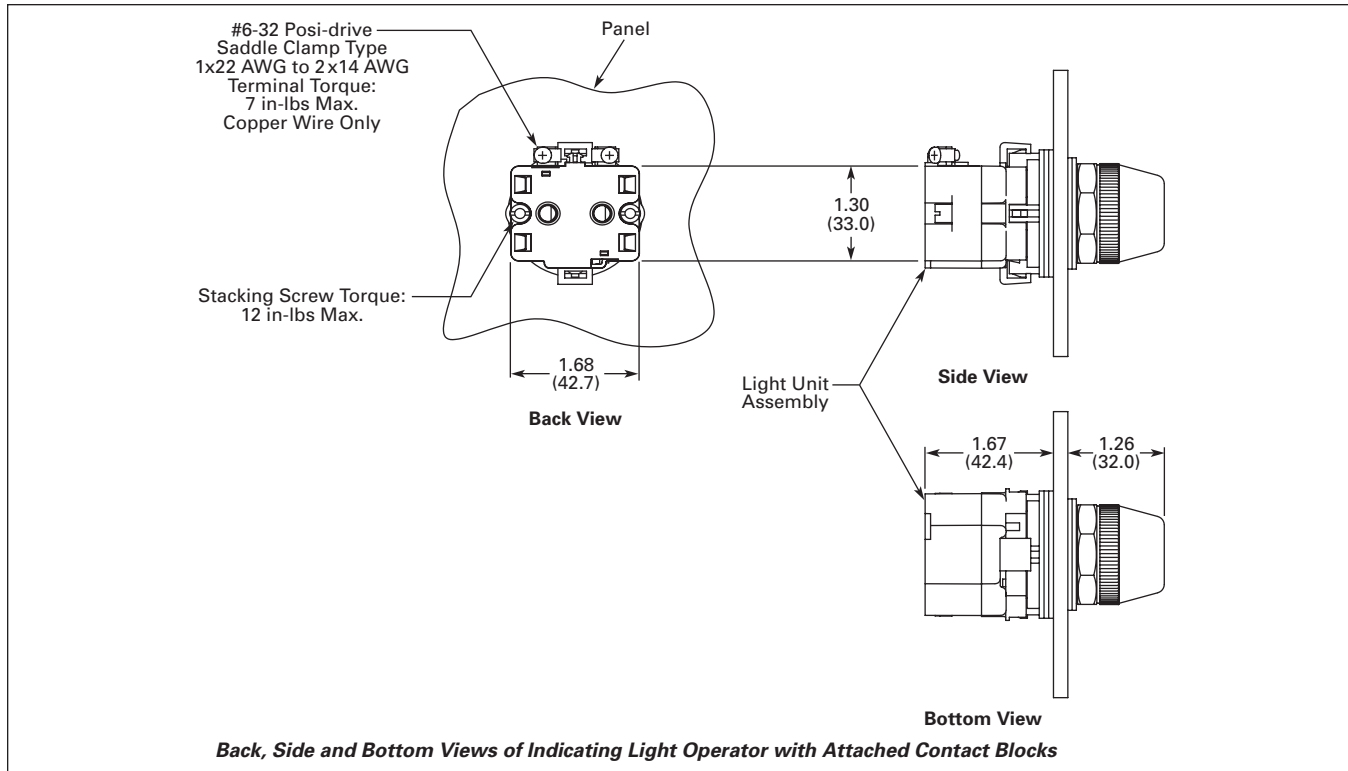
Indicating Lights — Approximate Dimensions in Inches (mm)
